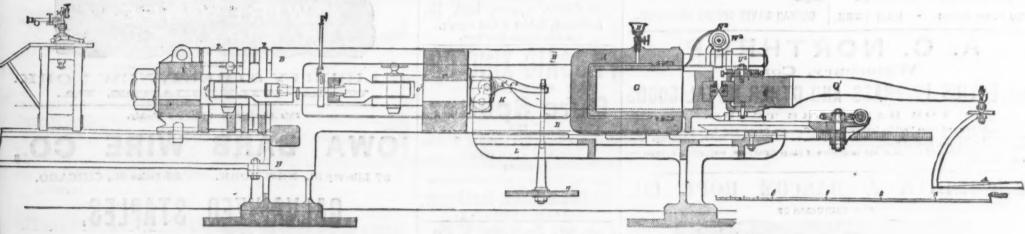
Sectional Elevation, Showing Principal Knife Edges.
